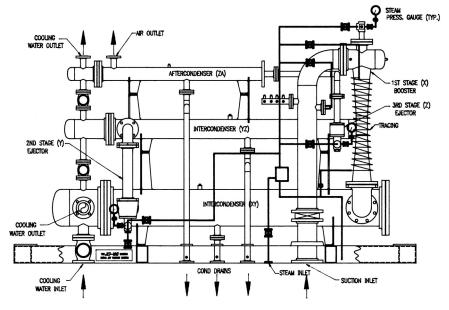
Packaged three-stage steam-jet vacuum system with shell and tube intercondensers and aftercondenser, interconnecting piping, external connections, and skidmounted. (Courtesy Jet-Vac, Corp.)
